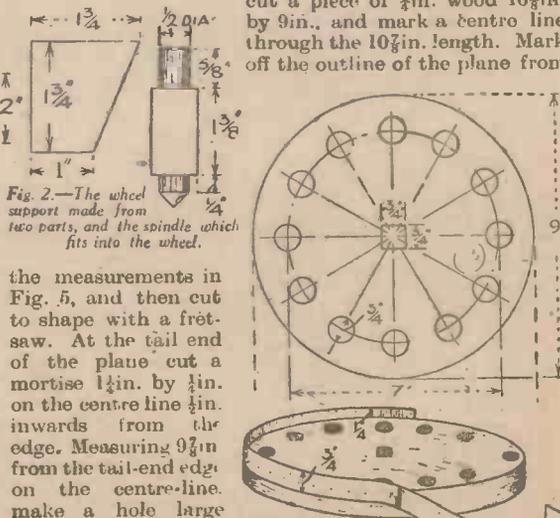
The wheel is marked out as shown above. Below is the way a strip edge is put round it.
